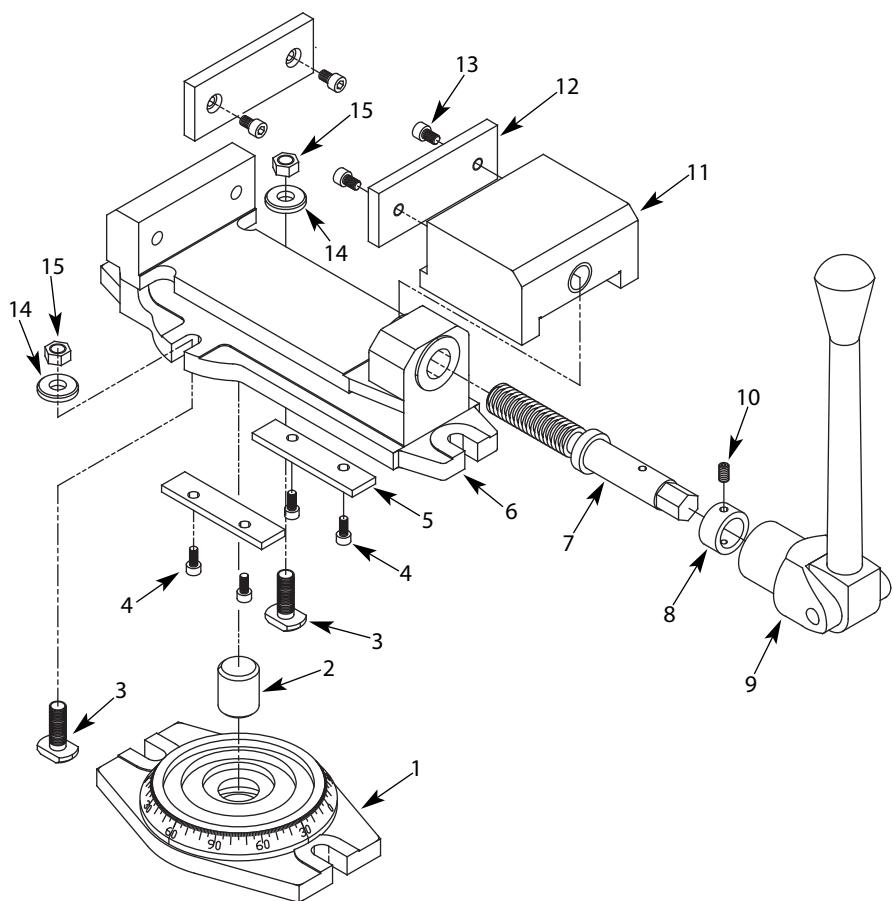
Replacement Parts Illustration for 4" and 6" Milling Vise
